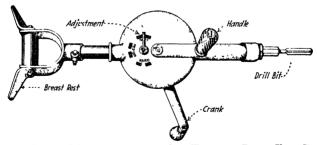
Breast drill for concrete work. (DIAMOND RAPID-FIRE DRILL.)
